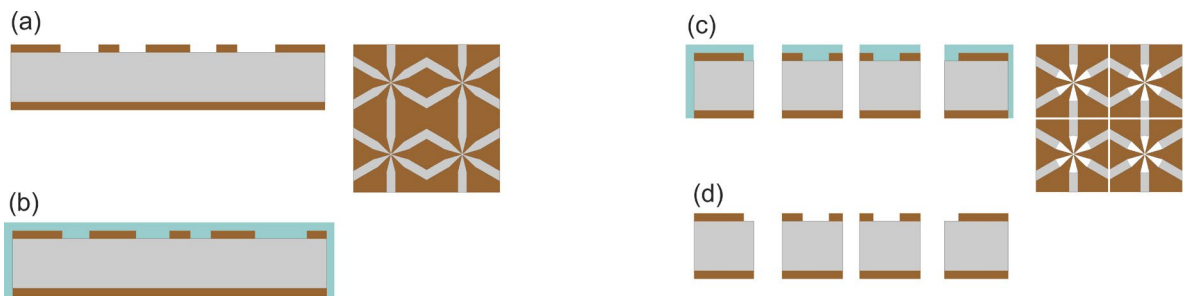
Process chain for the fabrication of a piezo actuator device using femtosecond-laser structuring and cutting.
